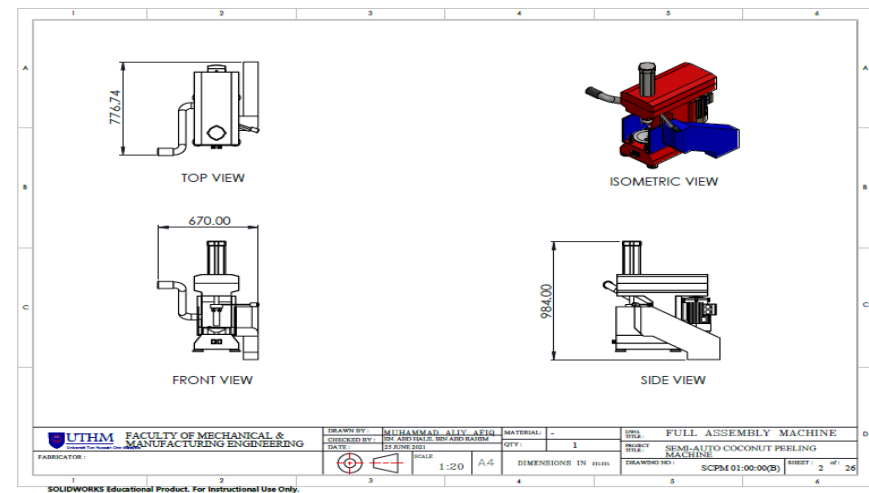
Full assembly of Semi-Auto Coconut Peeling Machine
